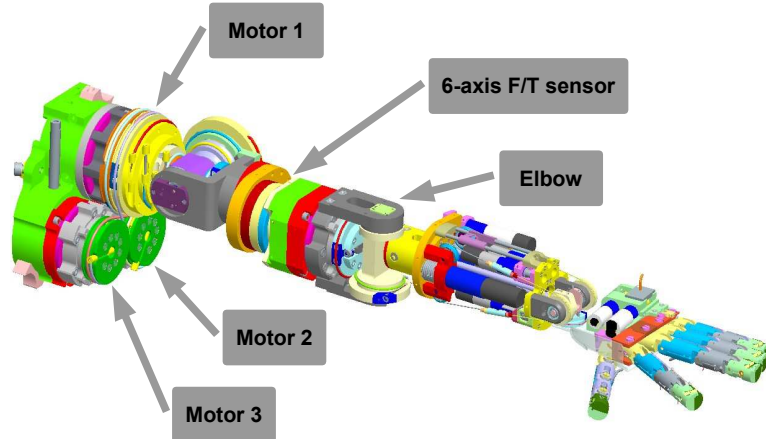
The iCub arm. A CAD view of the shoulder joint mechanism showing the three motors actuating the joint and the pulley system, the F/T sensor, the elbow and the hand.
